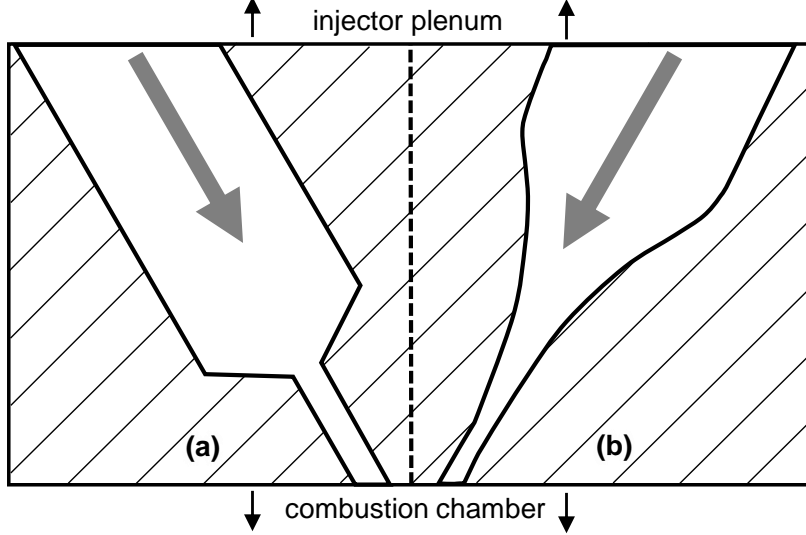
(a) Cross-section of impinging injection element fabricated using subtractive manufacturing techniques such as drilling. (b) Cross-section of tapered impinging injector element enabled by additive manufacturing.
